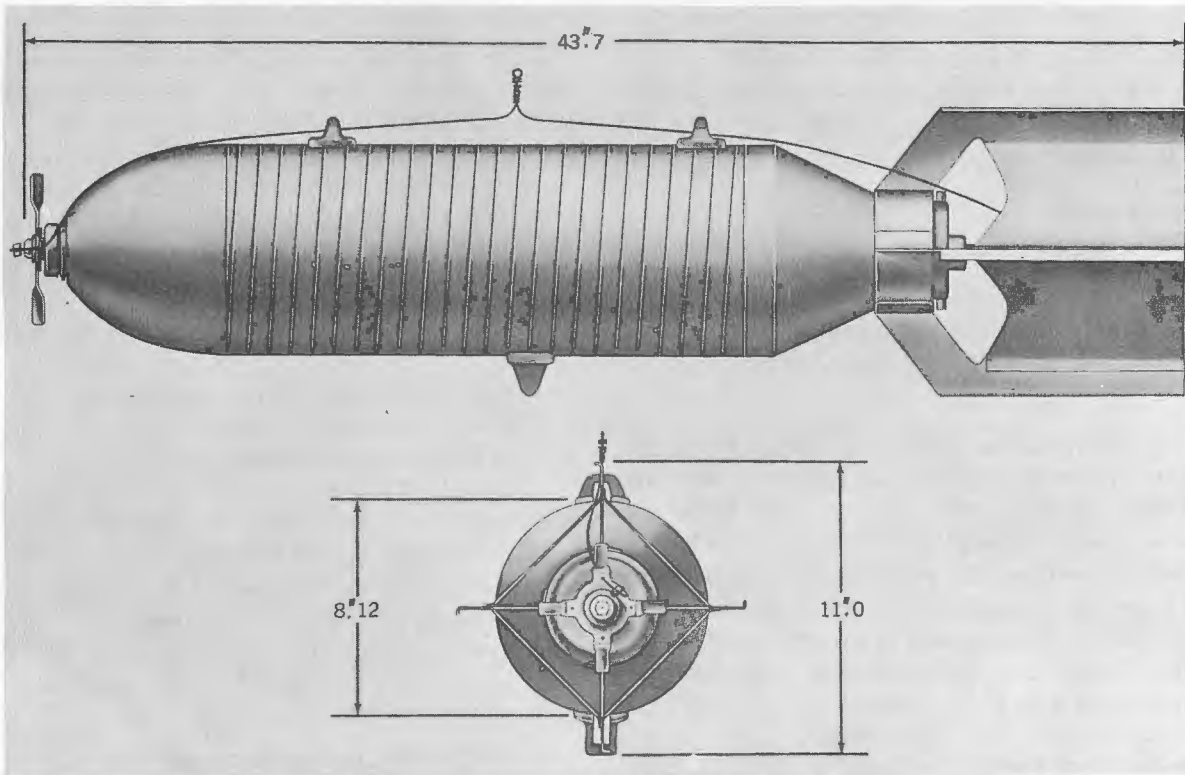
220-lb Frag Bomb AN-M88 with Fin Assembly AN-M103A1, Exterior View.
